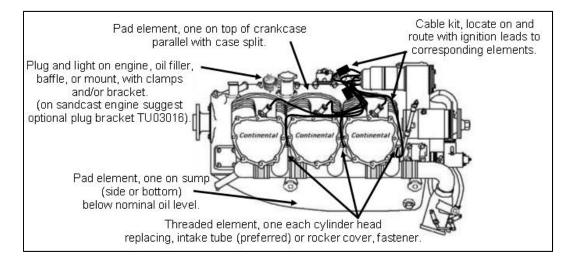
Continental engine kit layout (470/520 sand cast shown).
